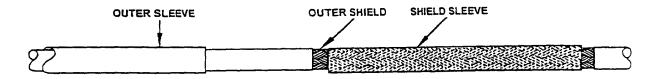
Double Shield Cable Repair with Solder Sleeve Primary Splice (Sheet 2)
